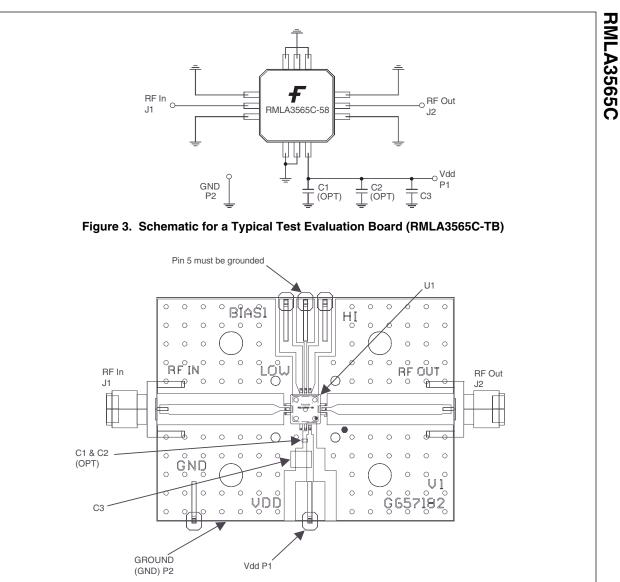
Layout and Assembly of Test Evaluation Board (RMLA3565C-TB)
